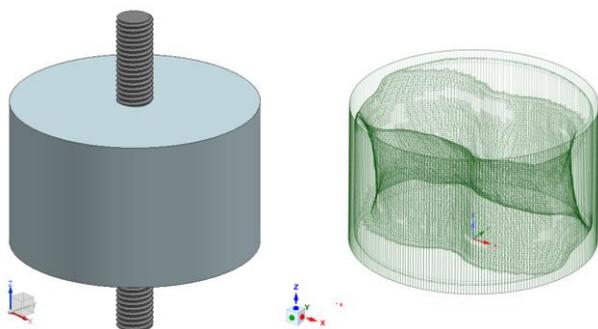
The shape of the baseline mounting rubber(left), The suggested design shape of the mounting rubber(right)
